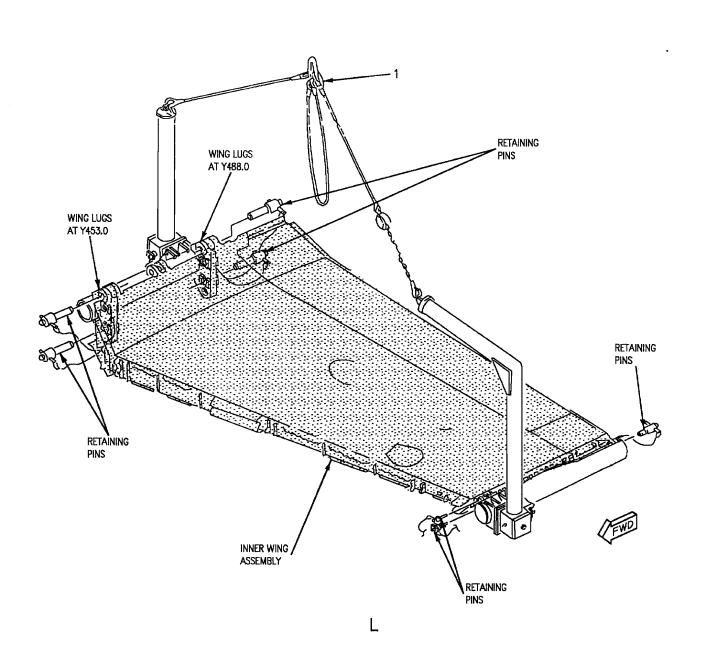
Inner Wing Removal and Installation Adapter (Sheet 7)
